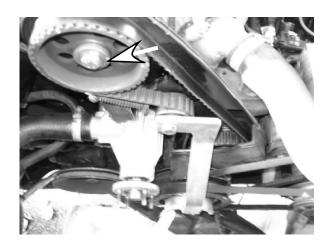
At the same time that you're loosening the crankshaft bolt (using the Volvo 5284 crankshaft holder tool), loosen the 17 mm bolt (arrow) on the overhead camshaft.
